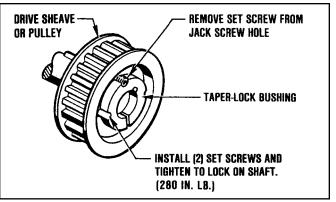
Installing Pulley with Taper Lock Bushing
